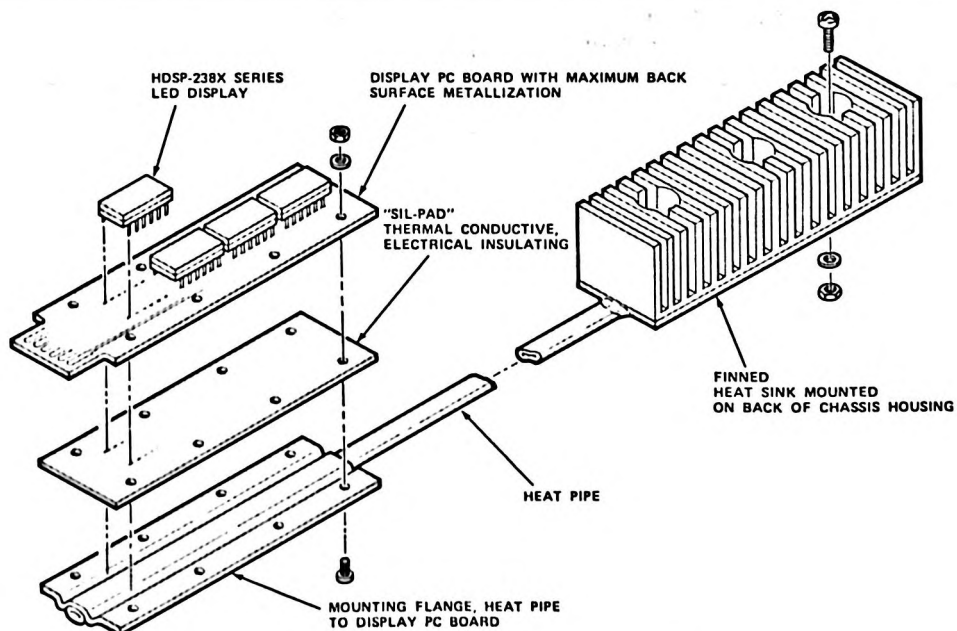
Using a Heat Pipe to Transfer Display Generated Heat to an Externally Mounted Finned Heat Sink.
